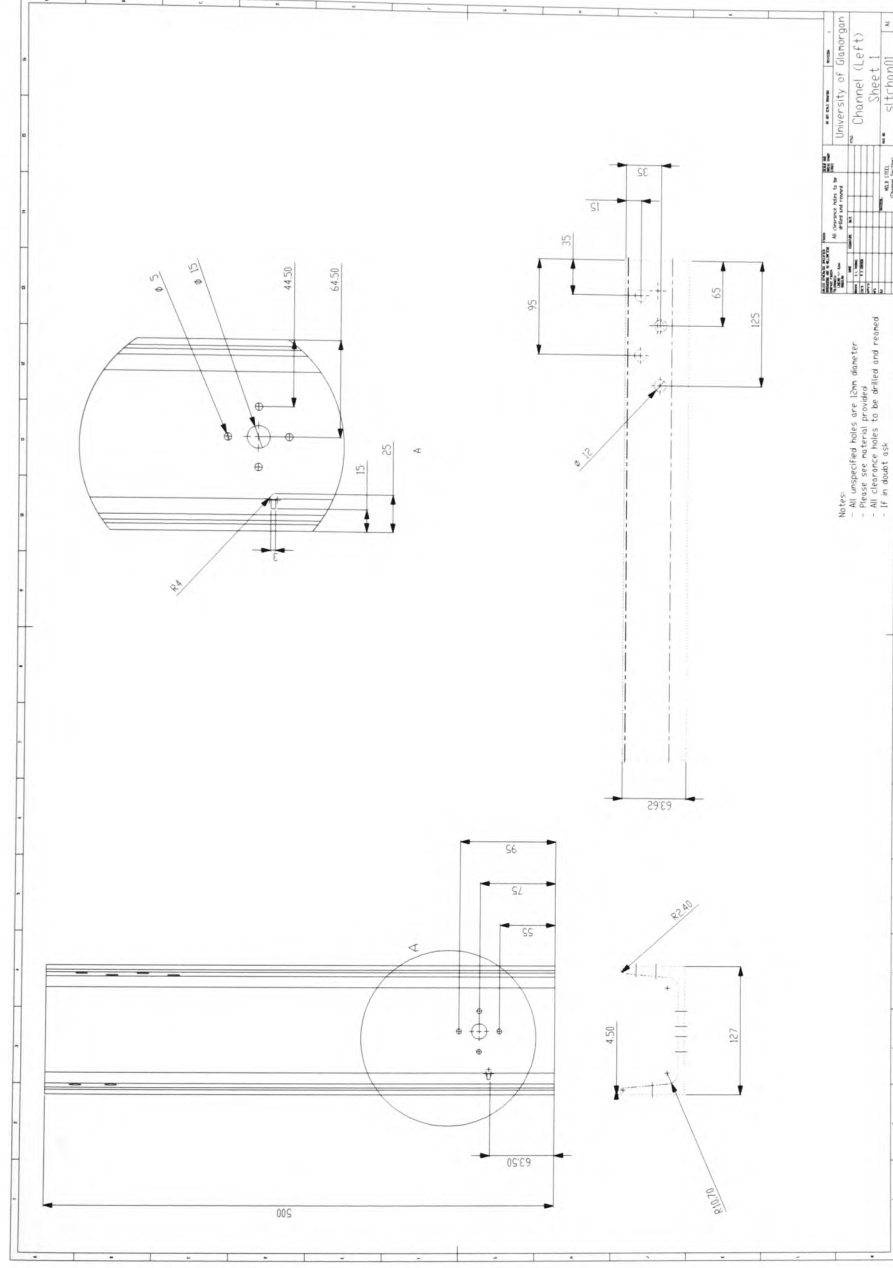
Manufacturing drawing of impact rig left hand strut (sheet 1)
